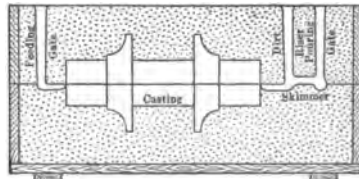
Green-sand Molding. Section of Finished Mold.
